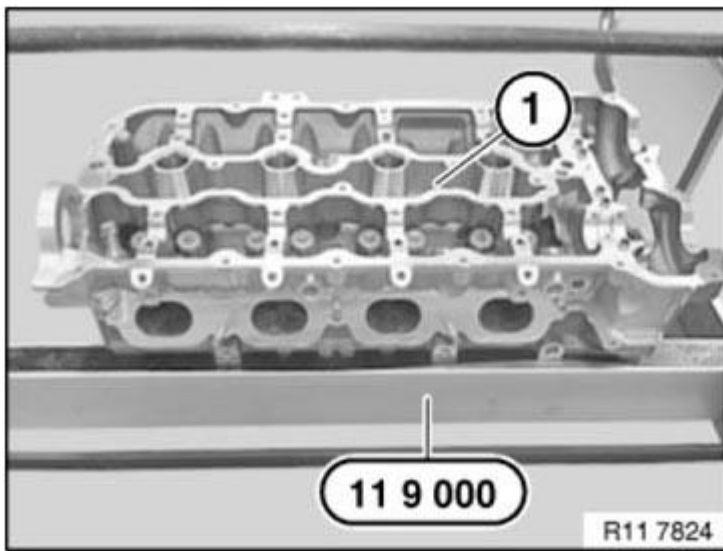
Mounting Cylinder Head On Special Tool 11 9 000
